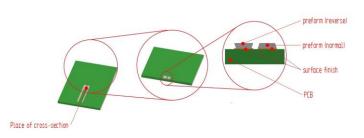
Schematic draw about the preform placement on the iAg surface finish before soldering.
